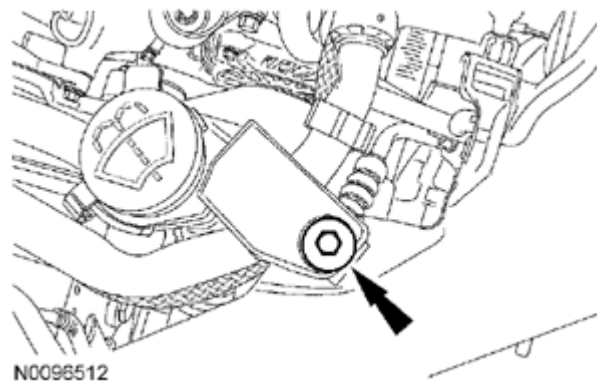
Locating A/C Tube/Windshield Washer Bottle Bracket Bolt
